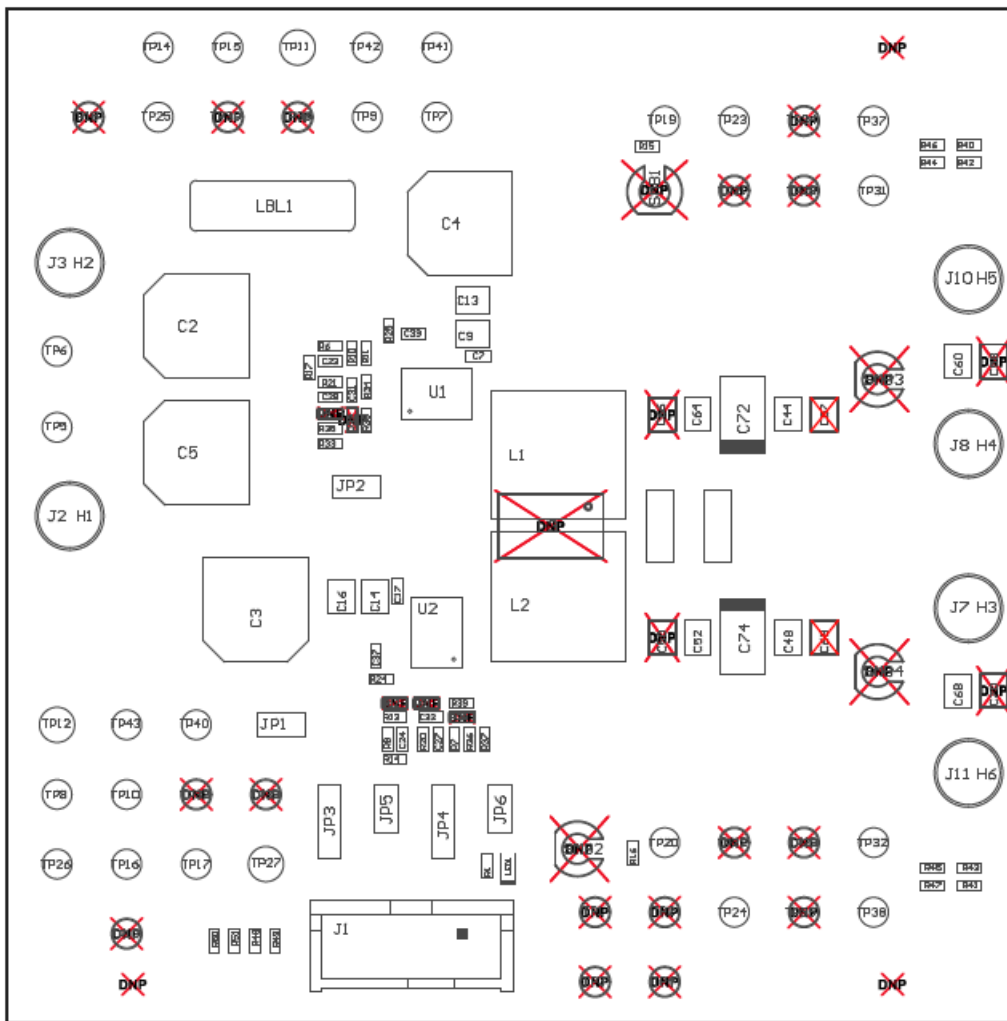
TPS546C23EVM2-746 EVM Top Layer Assembly Drawing (Top View)
